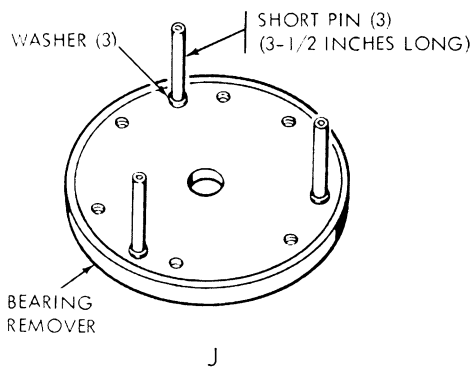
Final drive disassembly and assembly (sheet 2 of 4).
